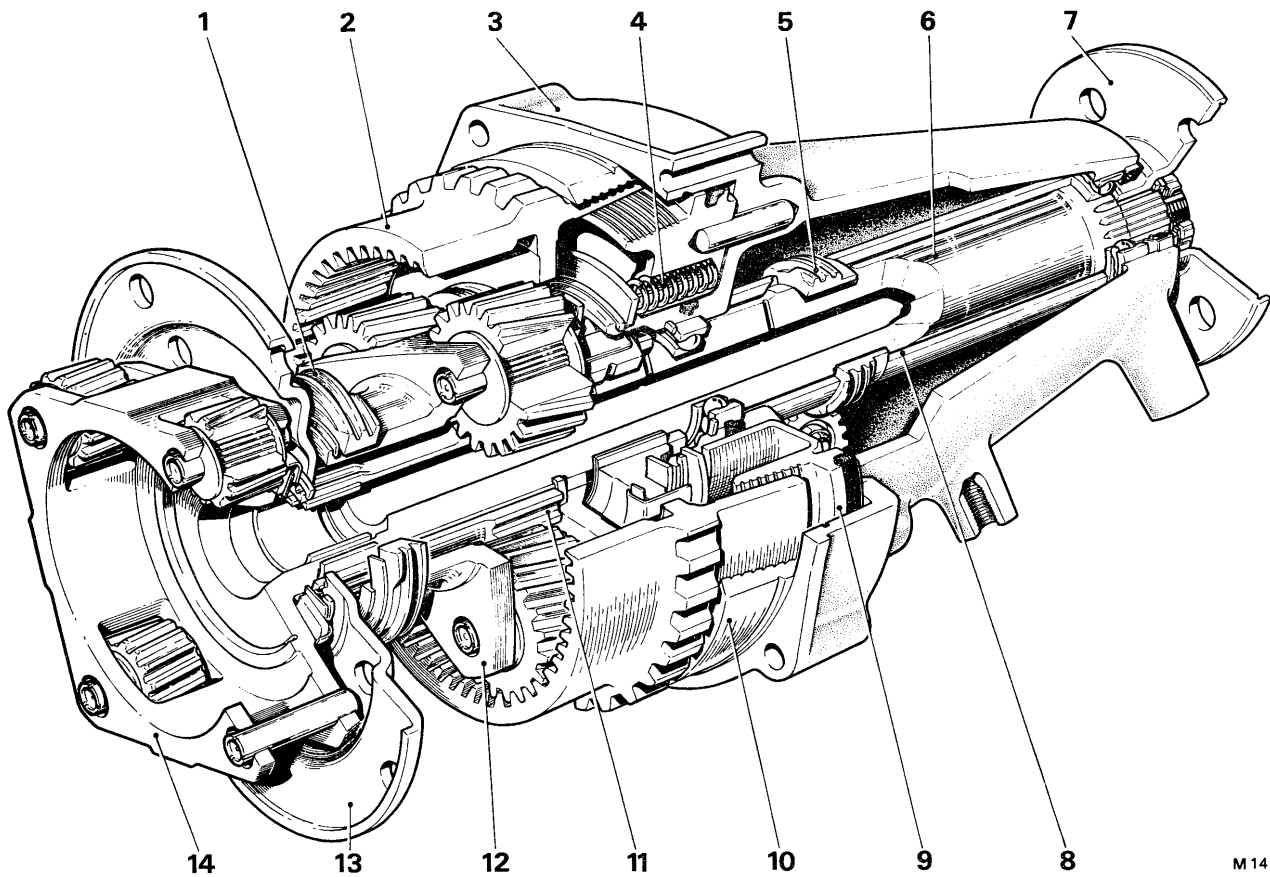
REVERSE ASSEMBLY — CUTAWAY VIEW
